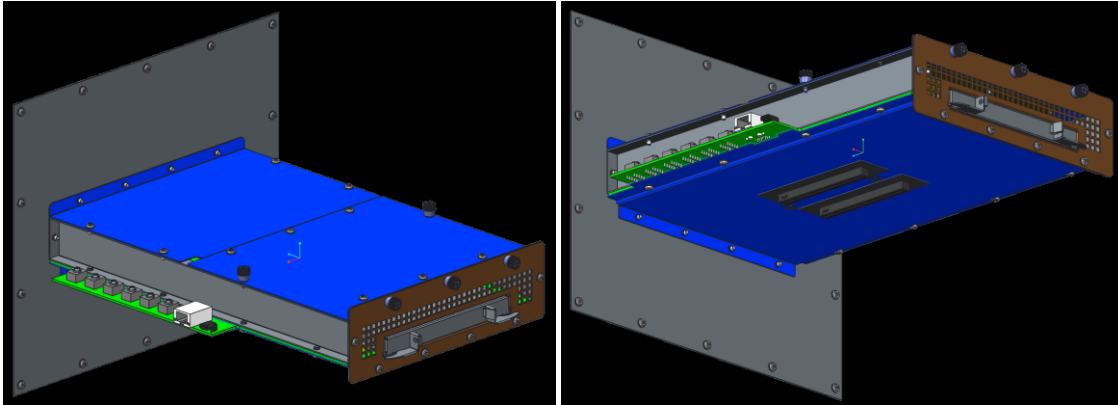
LFF Card Thermal Test Fixture Design – Cover Removed
